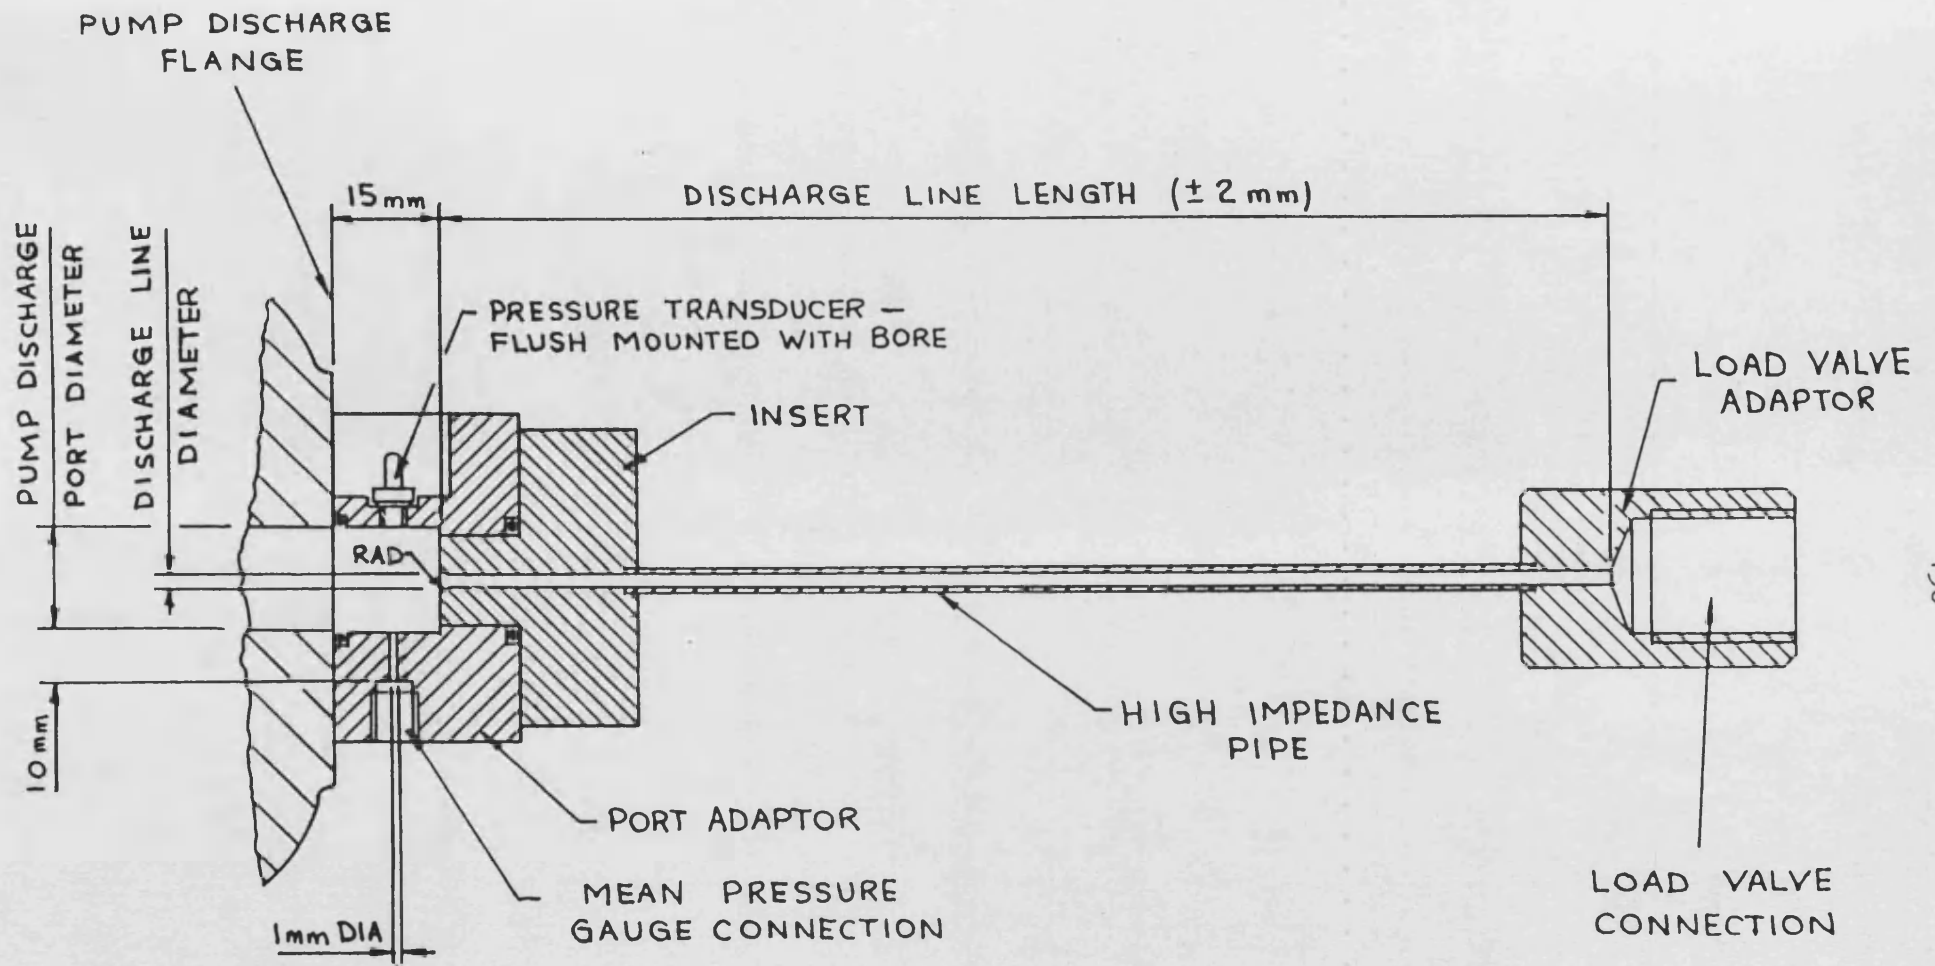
PUMP PORT ADAPTOR AND HIGH IMPEDANCE PIPE ASSEMBLY
